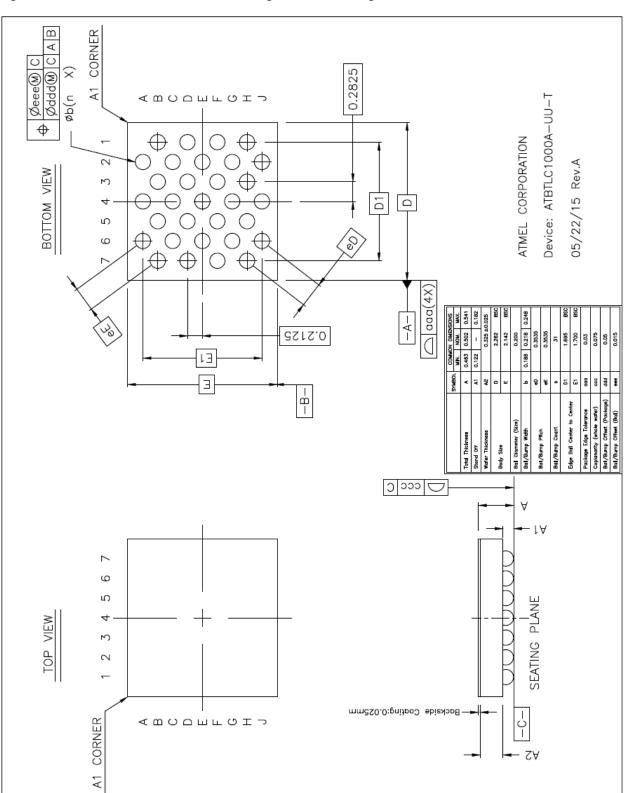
ATBTLC1000 31L WLCSP Package Outline Drawing
